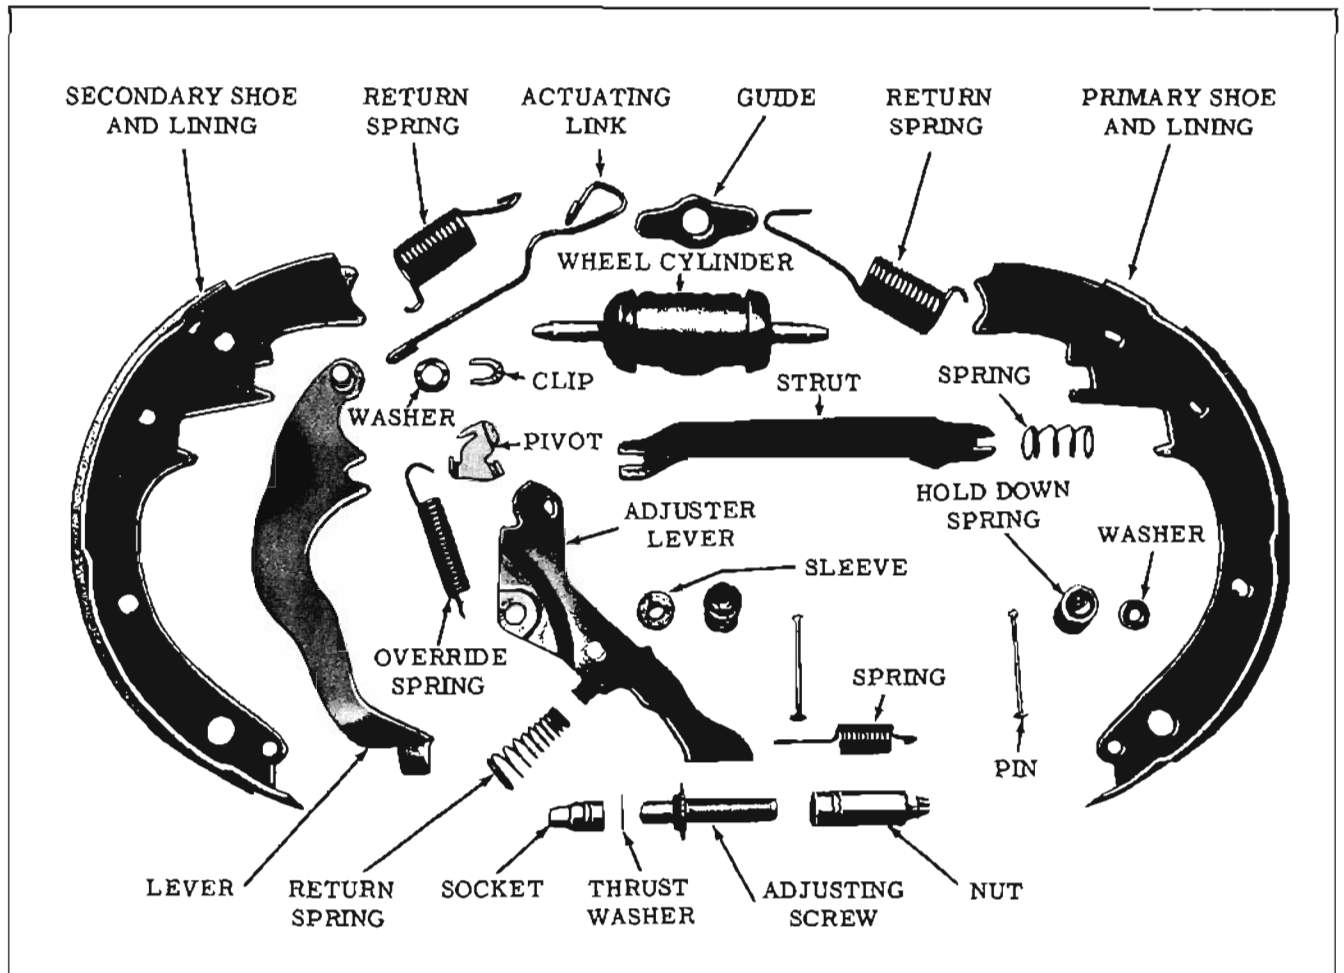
Brake Assembly (34, 35, 36, 38 & 39 Series)
